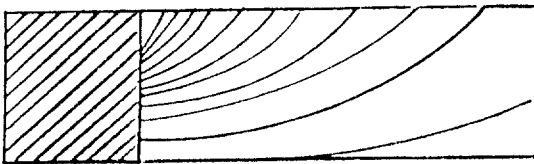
Macrograph of beach marks of fracture surface
